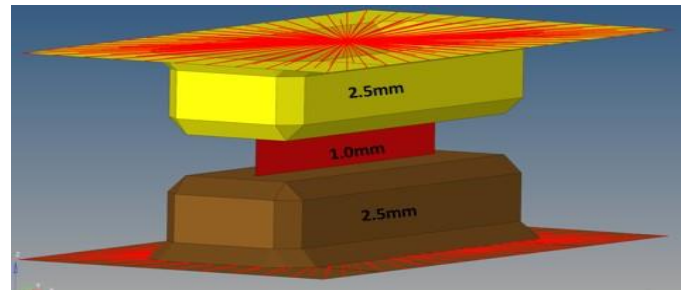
Simulation test setup of Weld joint(Red color) between the two components
